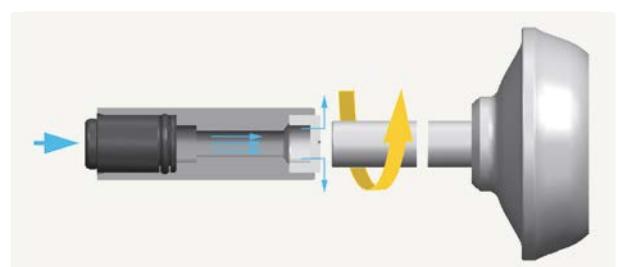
Airflow with the AERObearing; air pressure 6 bar
